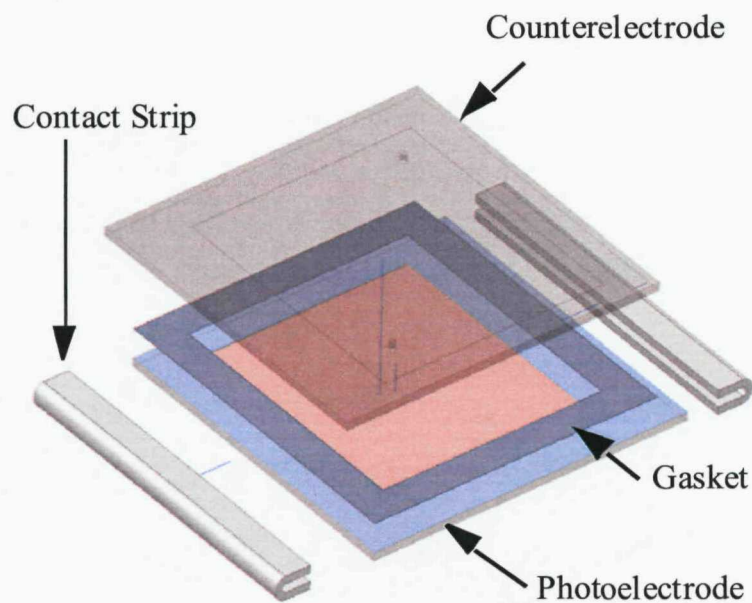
An exploded view of the laboratory DSSC showing the assembly of the components.
